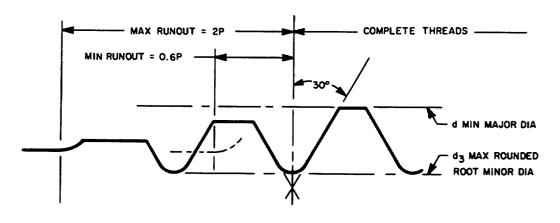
COMPLETELY FORMED EXTERNAL THREAD
